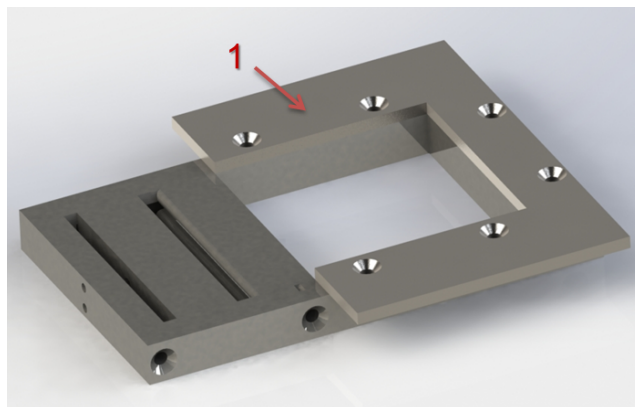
Solid Works drawing of the sample holder. The foil or sample target is put between the U shaped steel plate (1) and the frame. This holder can then be placed on a linear manipulator.
